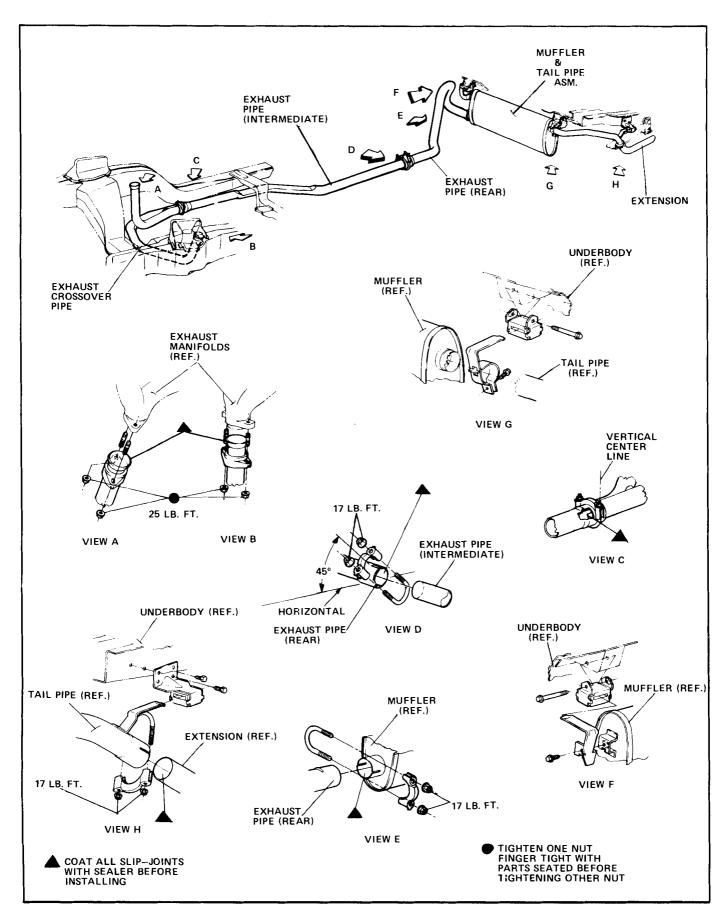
Installation of V-8 Single Exhaust System (F Series)
